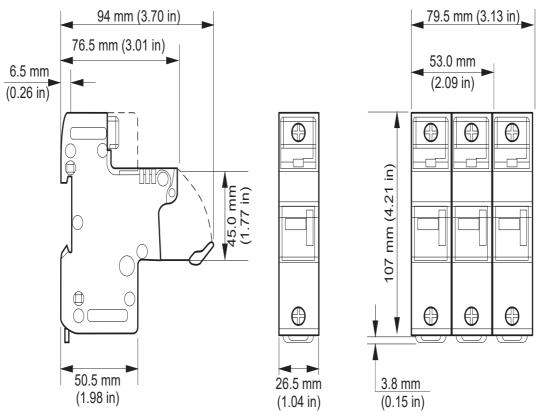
Fuse holder dimensions: US141 (14x51mm)
